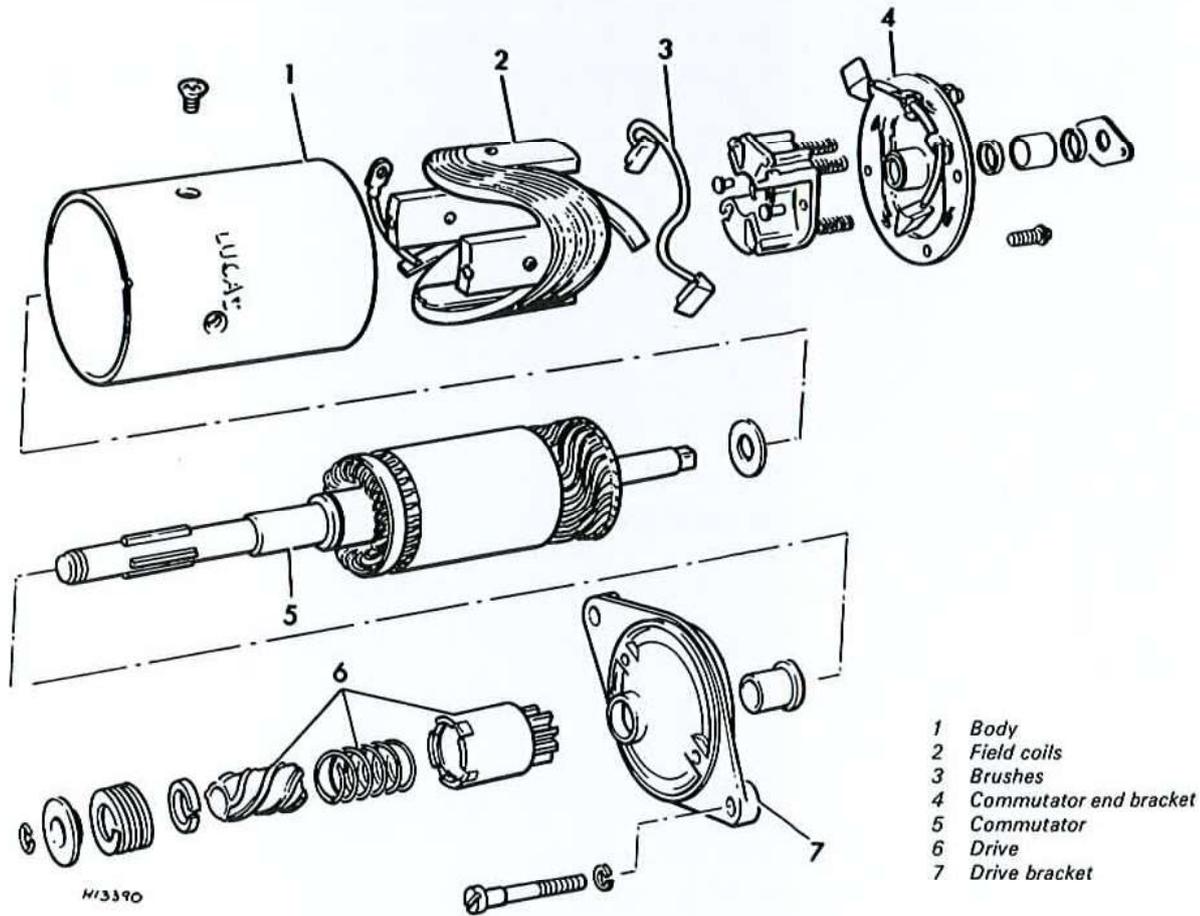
Exploded view of Lucas M35J starter motor (Sec 26)
